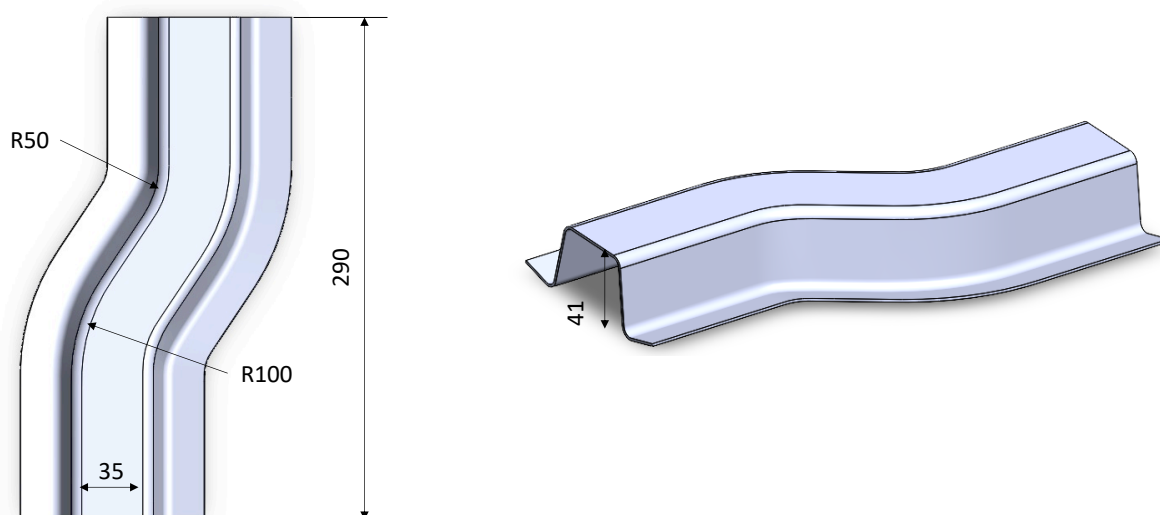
S-Rail component geometry (standard component with laser trimming)
